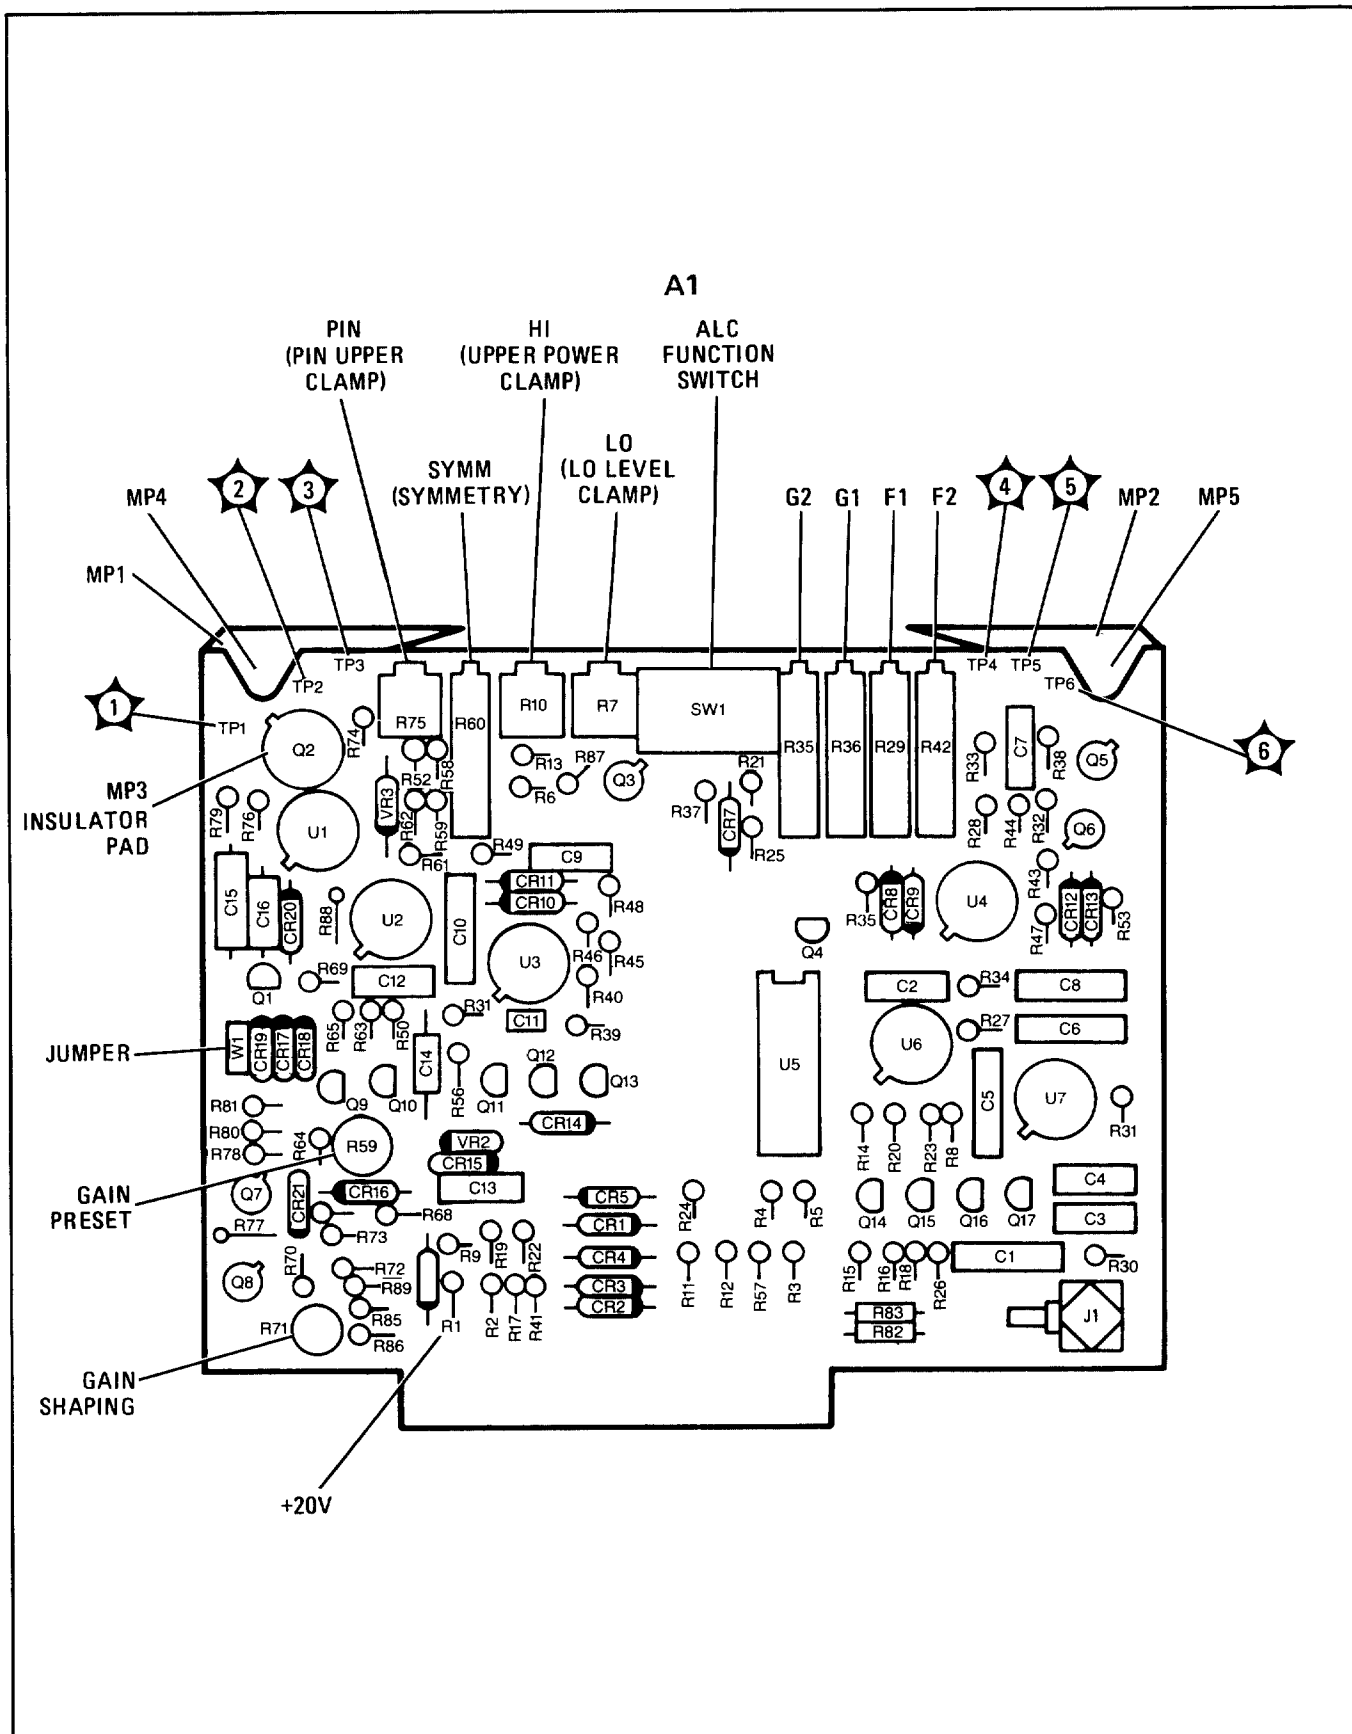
A1 ALC Assembly, Component Locations (CHANGE C)
